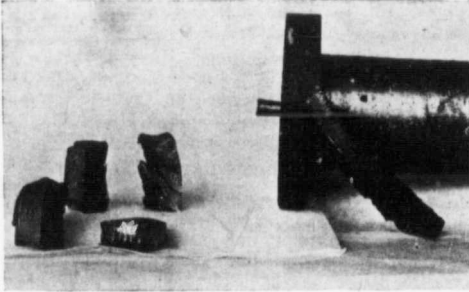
Sample of Broken Chips and Work with an Unbroken Chip. The View is About One-seventh Larger than Sample, the Exact Dimensions Being $1\frac{1}{4}$ In. Down to About 1 In. Diameter. The Feed was About 7 per Inch, Cutting Angle of Tool About 38 Deg., Extreme Edge 1-32 In. Flat. These Chips Were Broken by a Scheme Similar to that Shown in Fig. 16.
